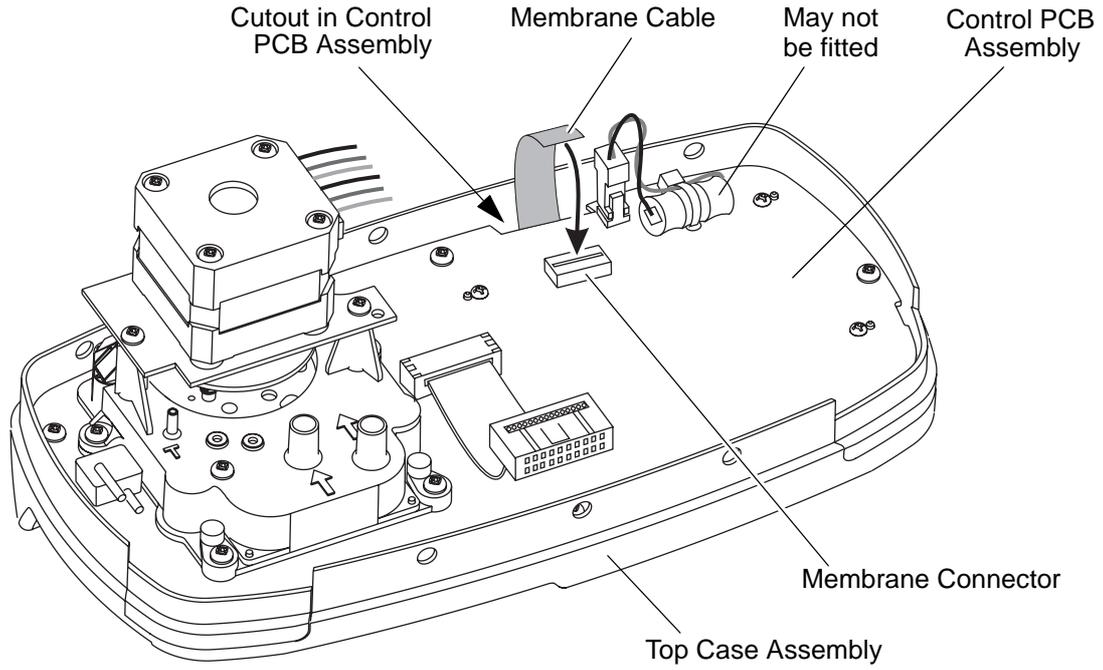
Connecting the Membrane Cable to the Membrane Connector on the Control PCB Assembly
